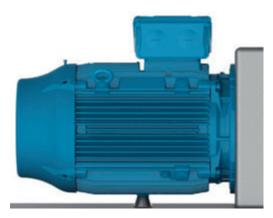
Mounting method of flange mounted motors with frame base support
